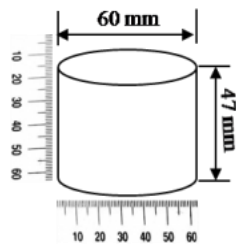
Dimensions of Cylindrical PVC Specimen.
